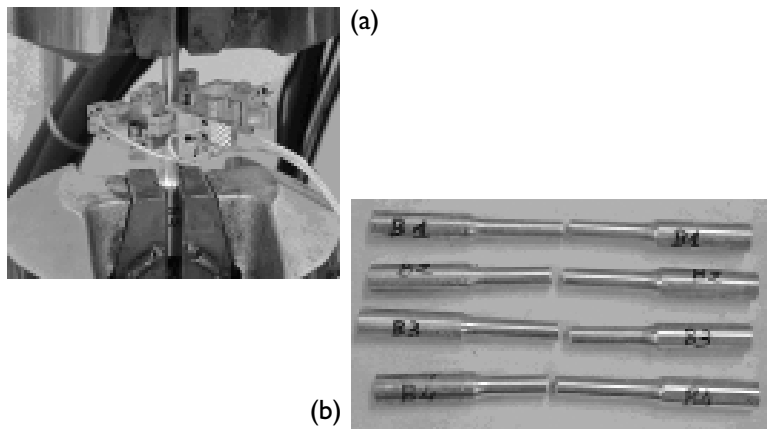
(a) Tensile test with biaxial extensometer; (b) failure mechanism.
